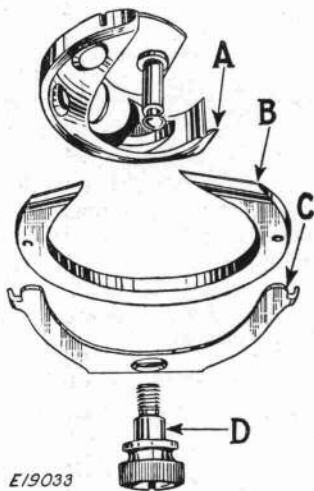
SHUTTLE AND PARTS REMOVED FROM MACHINE
